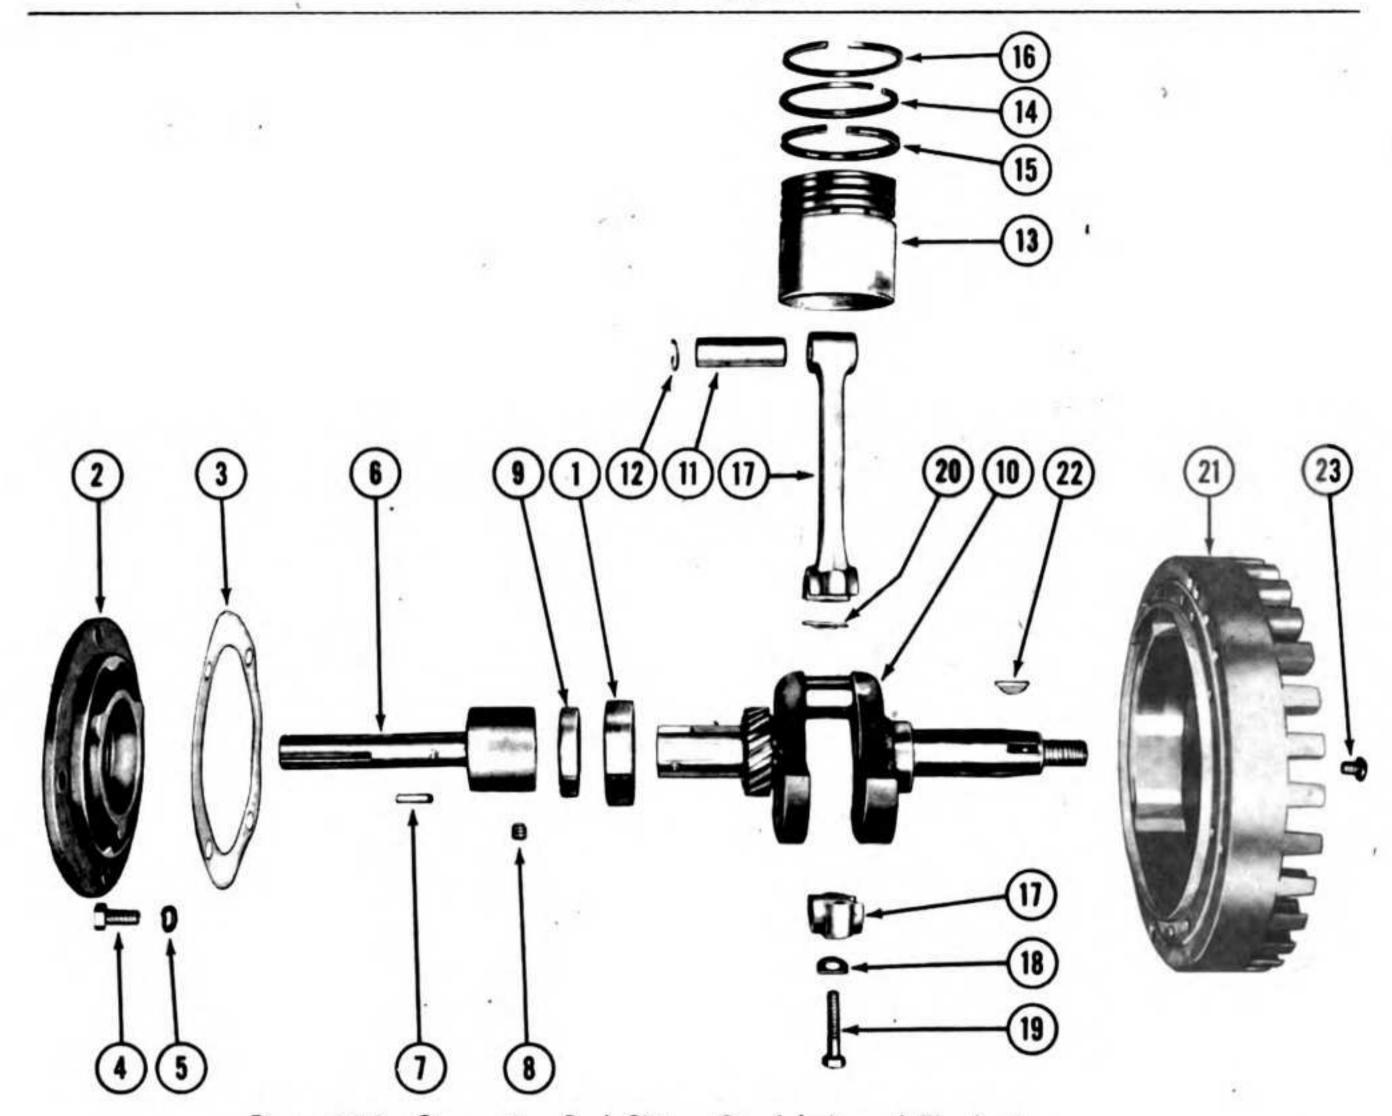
Connecting Rod, Piston, Crankshaft, and Flywheel
